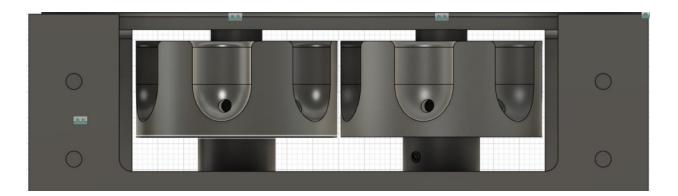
Hole cut in baseplate for completed Cool Beans to be extracted.
